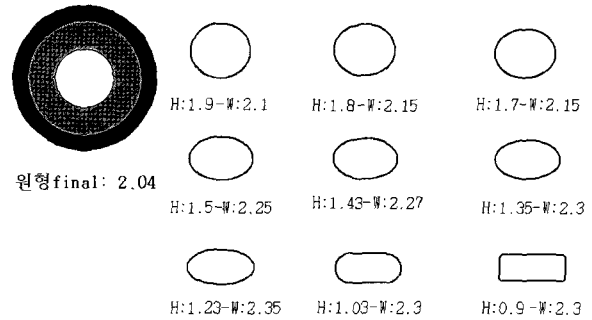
The formation of rectangular dies with tape dimension. (unit:mm)
